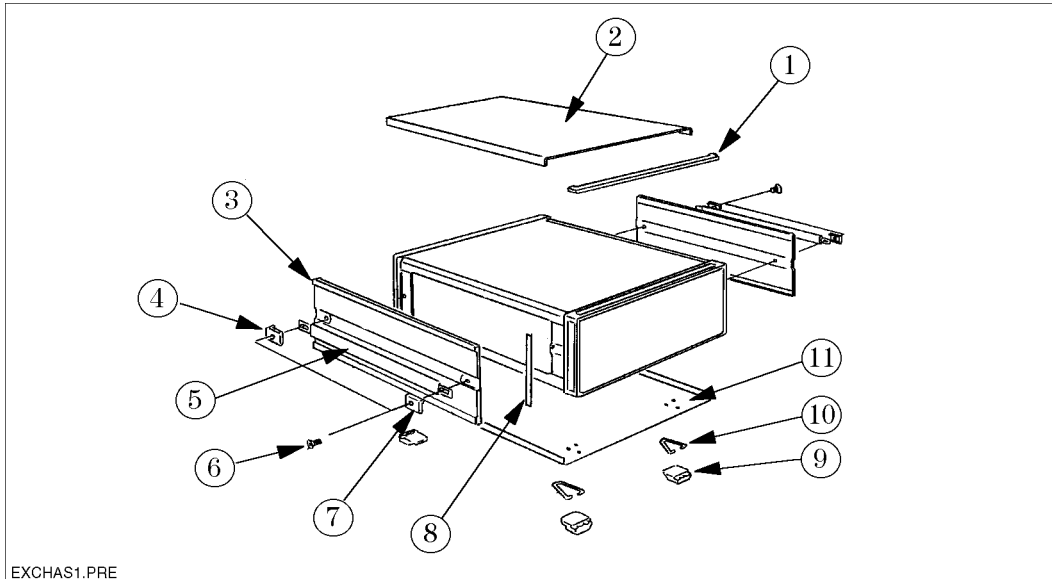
HP 41501B Chassis Parts Location (1 of 2)
